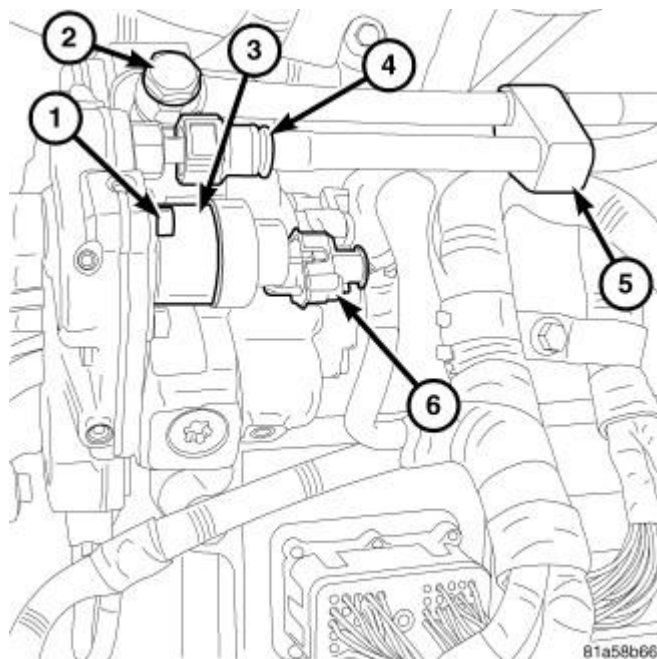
FUEL INJECTION PUMP - REAR VIEW
